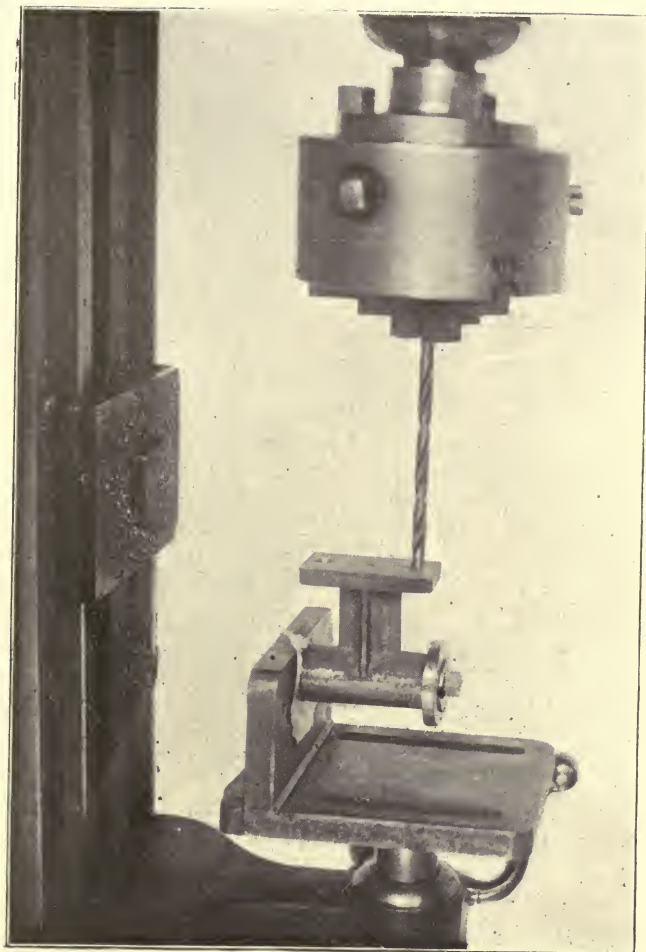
DRILLING CYLINDER SUPPORTS FOR SCREWS.
